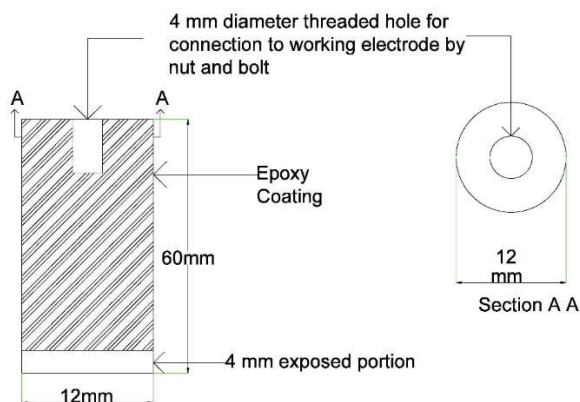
Cross-sectional details of prepared steel specimen used for experimental works
